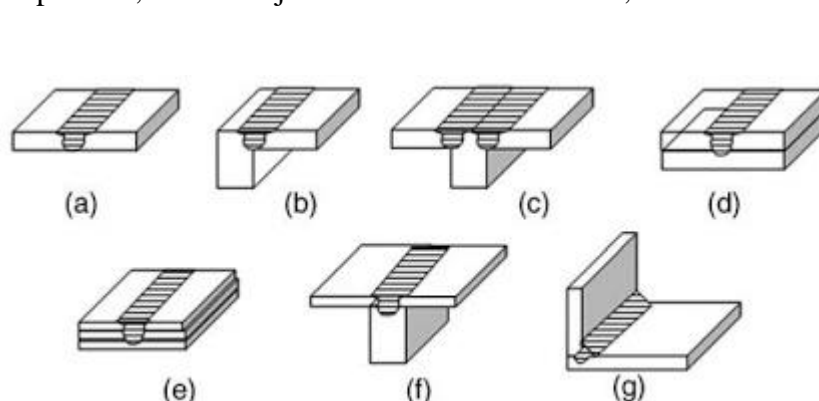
Joint configurations for friction stir welding: (a) square butt, (b) edge butt, (c) T butt joint, (d) lap joint, (e) multiple lap joint, (f) T lap joint, and (g) fillet joint [28].
